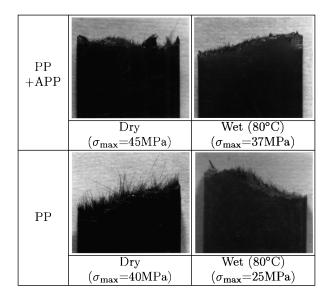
Macroscopic appearance of fatigue failured specimens.
